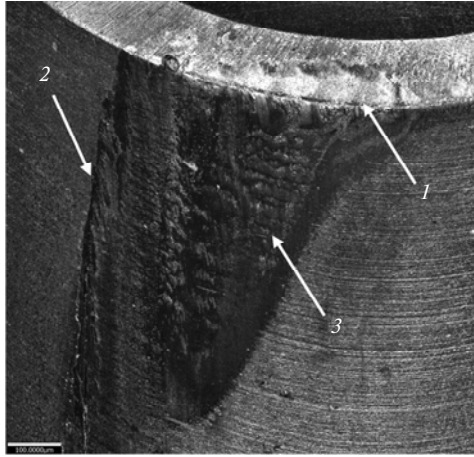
Condition of cBN 7015 cutting wedge after turning at a feed rate of 0.1 mm/rev: 1 – groove; 2 – adhesive peak-ups; 3 – abrasion on flank face.
